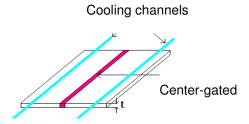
Flat part with straight cooling channels (Poli, 2001)
